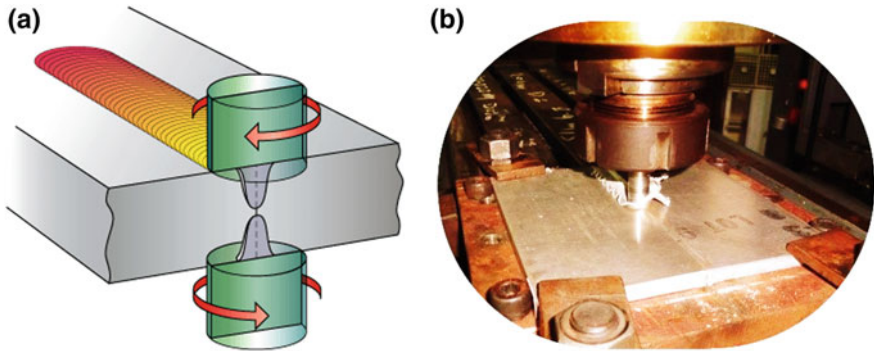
Schematic illustration and equipment of double-sided friction stir welding
